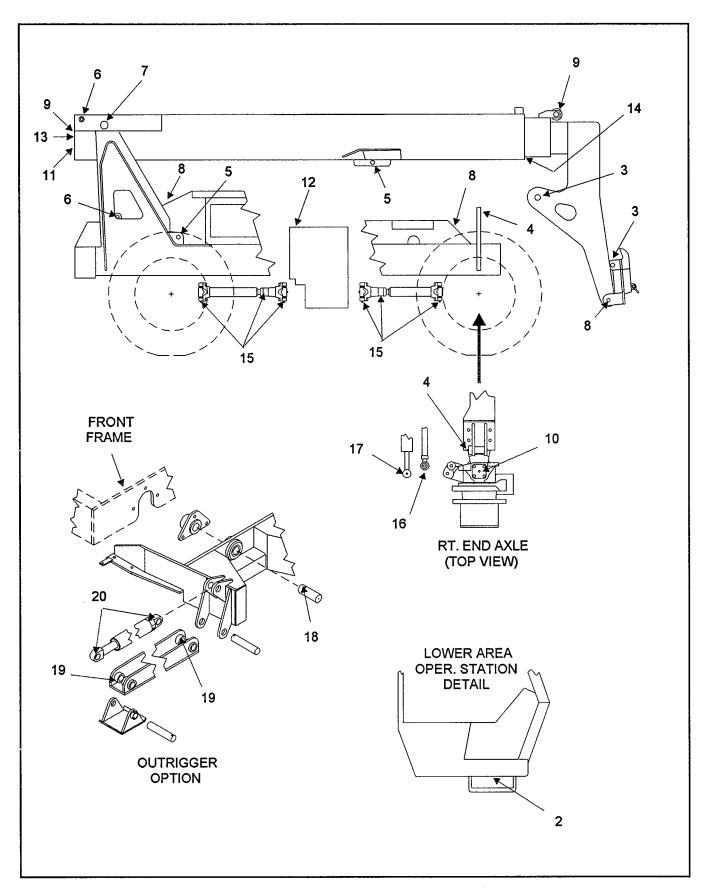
Grease Fittings, Basic Machine & Outriggers
